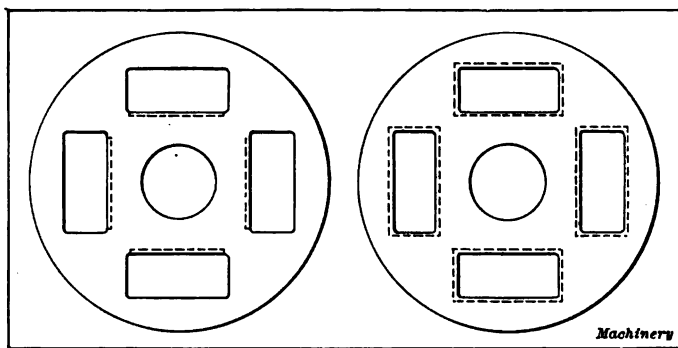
Plan View showing Four Rectangular Holes which are Finished by Broaching in Two Operations
